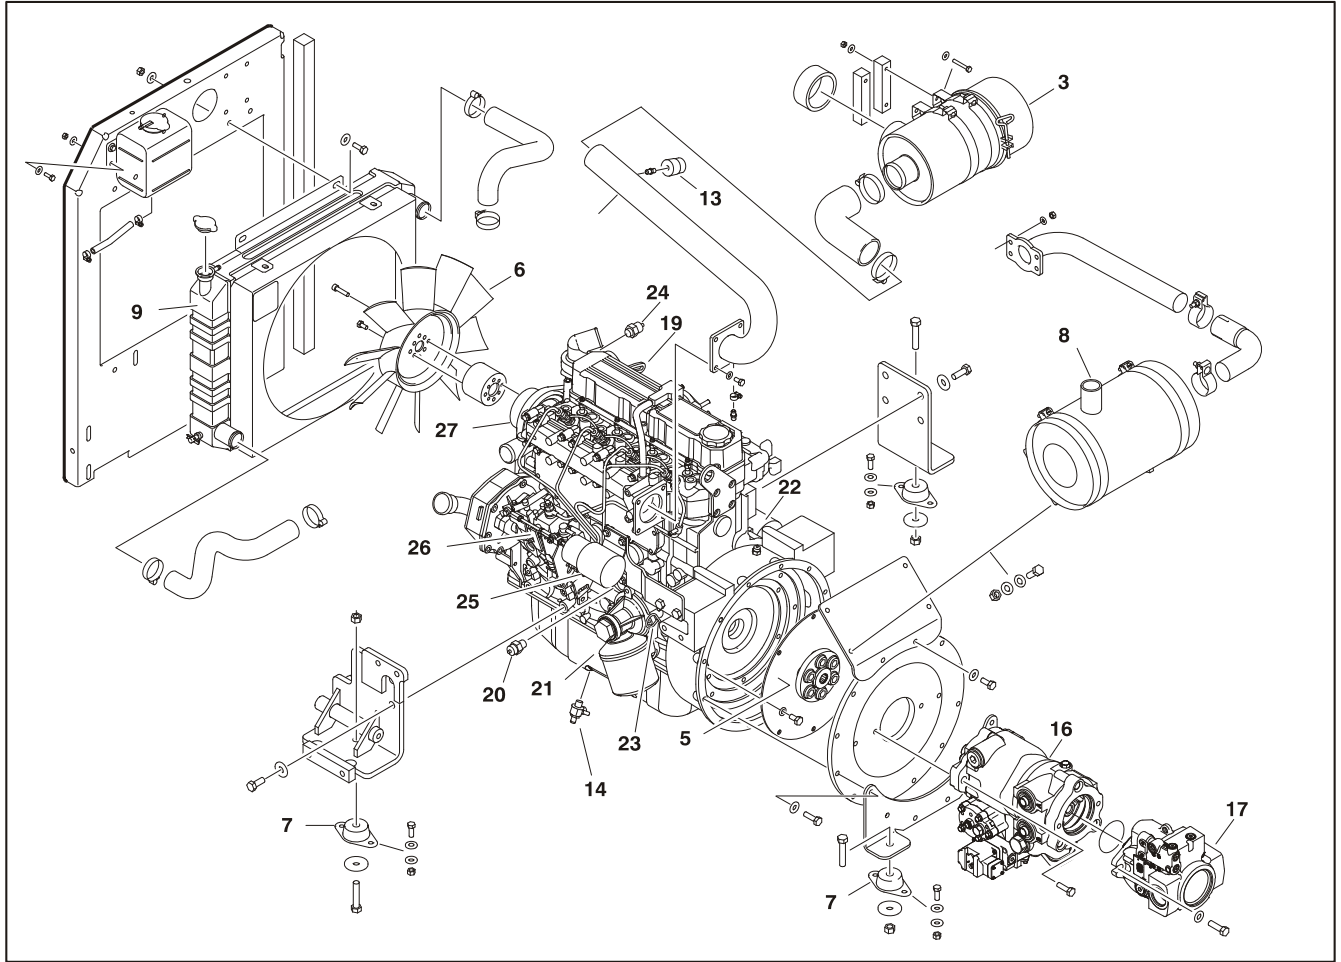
Deutz Engine Installation - Sheet 1 of 2
